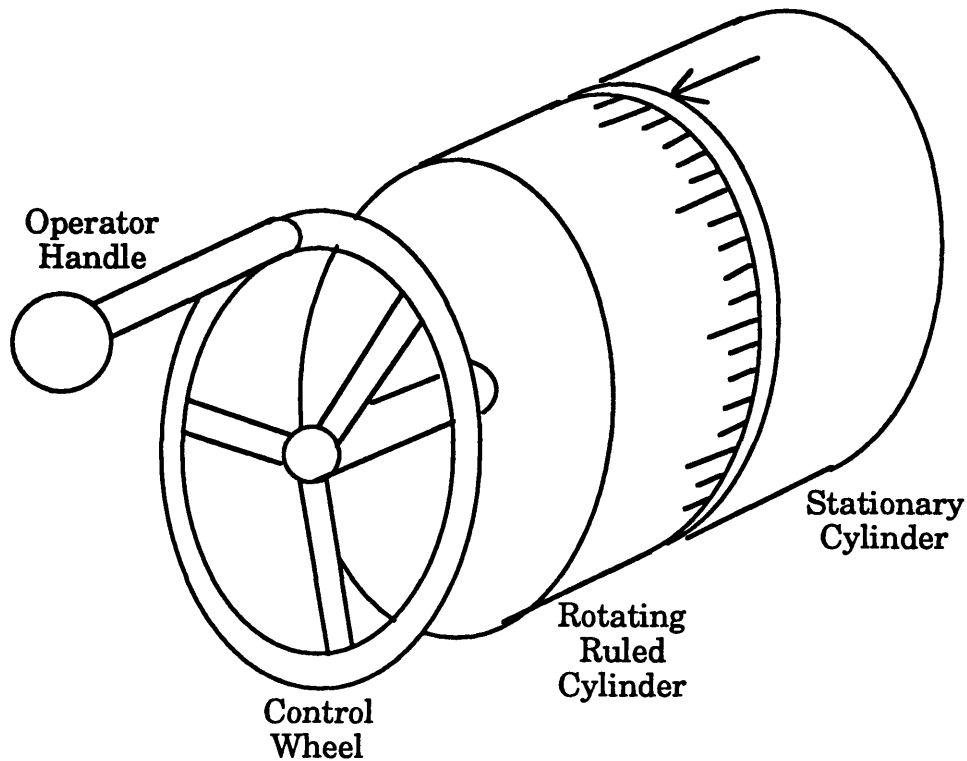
Manual CMM Workpiece Table Axis Controller
